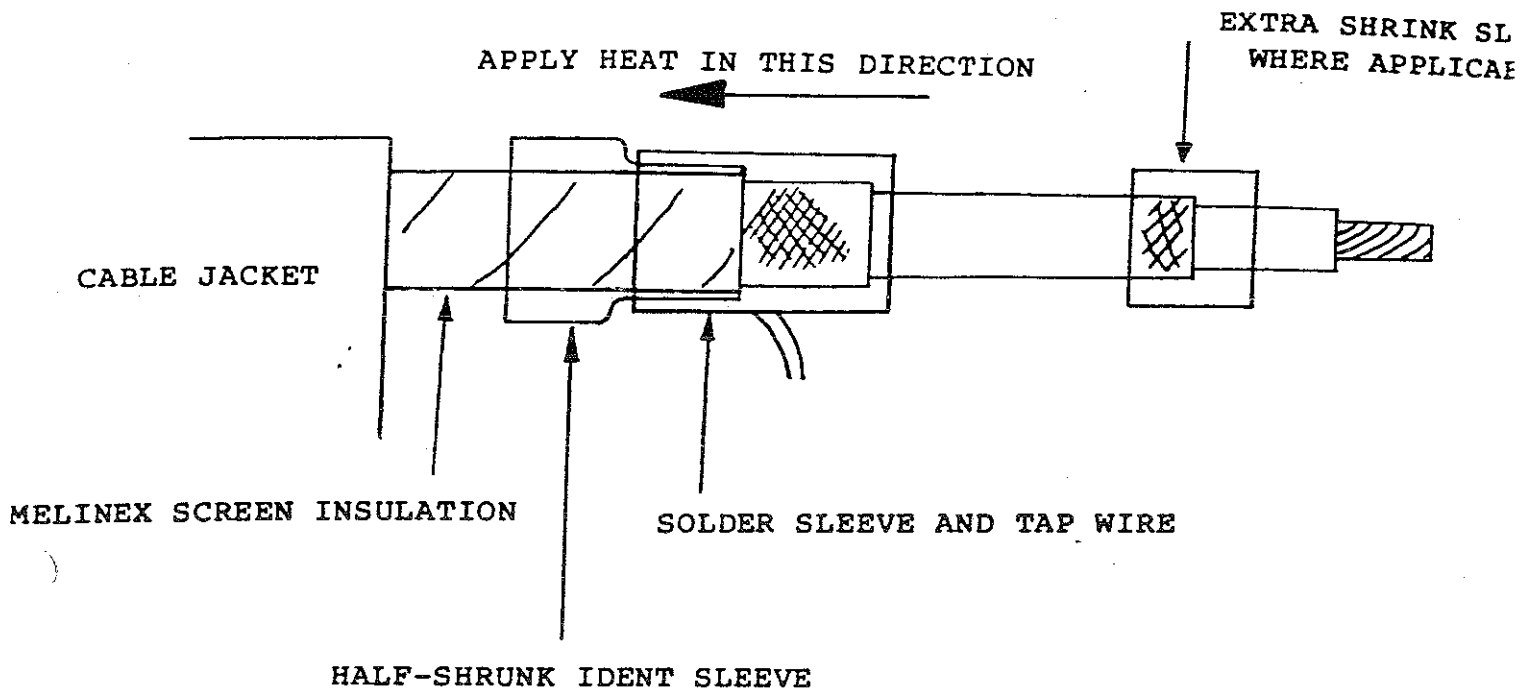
POSITIONING OF SOLDER SLEEVE AND TAP WIRE
